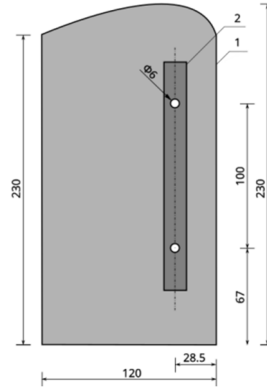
Working element for Barikell trowels, model PALA 4-60, diameter 600 mm, 1 – surface of the working element, 2 – mounting
